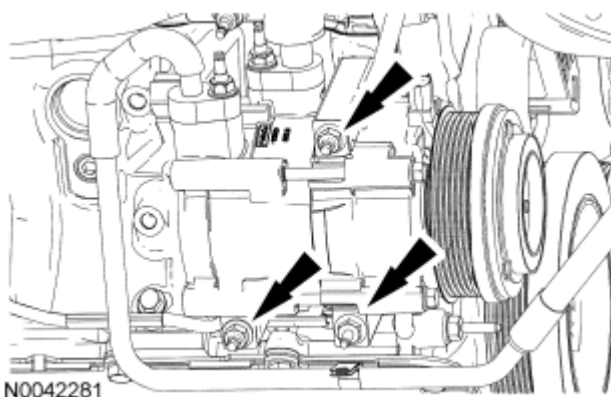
Locating Stud Bolt, A/C Compressor And Nuts
